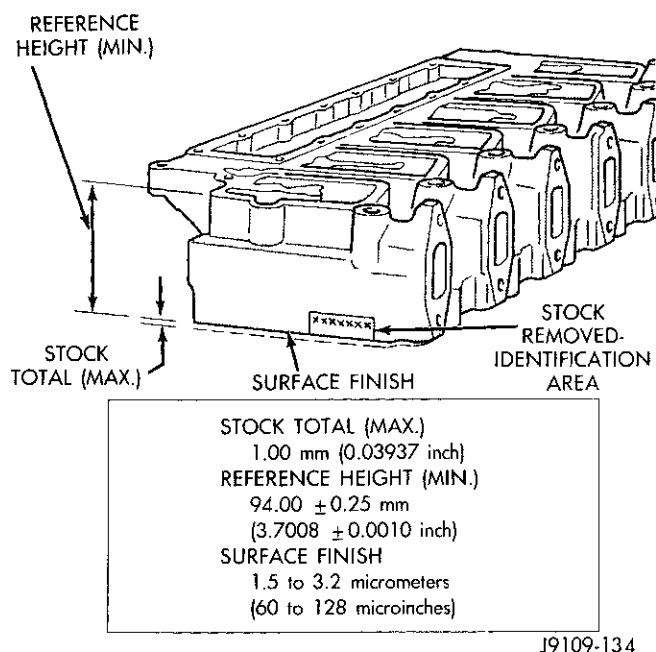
Cylinder Head Combustion Deck Face Measurement
